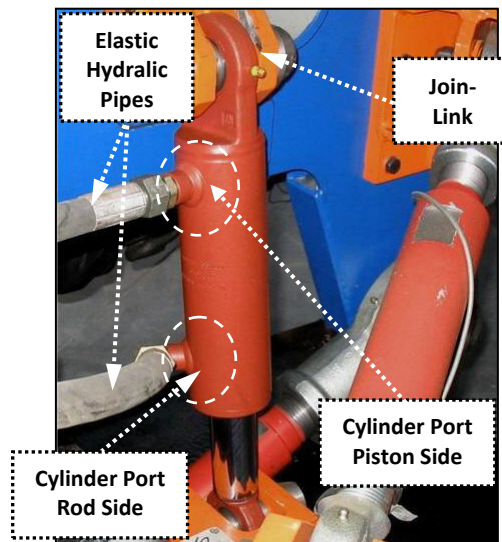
Hydraulic cylinder and head/rod side ports.
